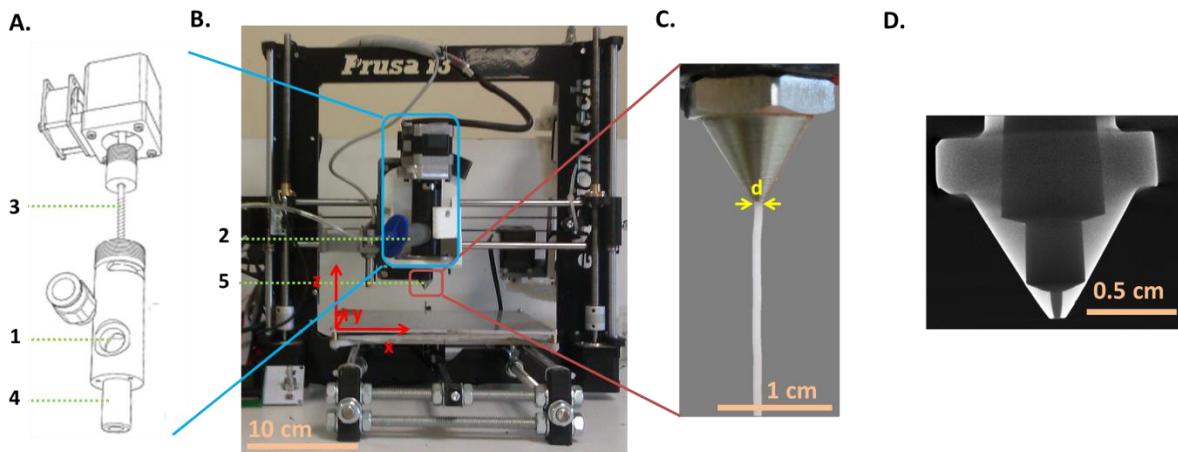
3D printer Prusa i3 upgraded with a Liquid Deposit Modeling WASP Extruder – (A) Close-up and exploding drawing of the LDM extruder(www.3dwasp.com), (B) Picture of the printer used in this work, (C) Close-up of nozzle with an inner diameter of 0.7 mm and (D) 2D view of an X-ray Computed Tomography (XCT) scan of the nozzle .
